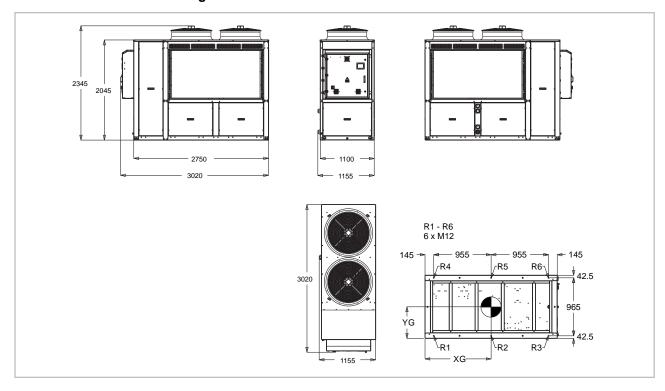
Dimensions of KWP 790-1120 Eco with storage tank (all measurements in mm)
